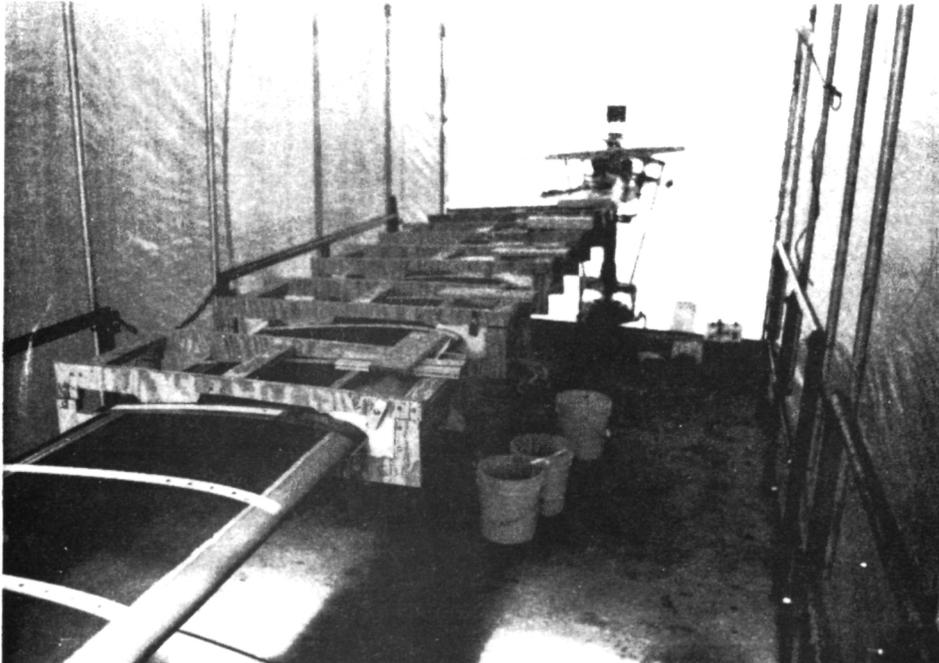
ROTOR BLADE AND MOLDING BOXES
